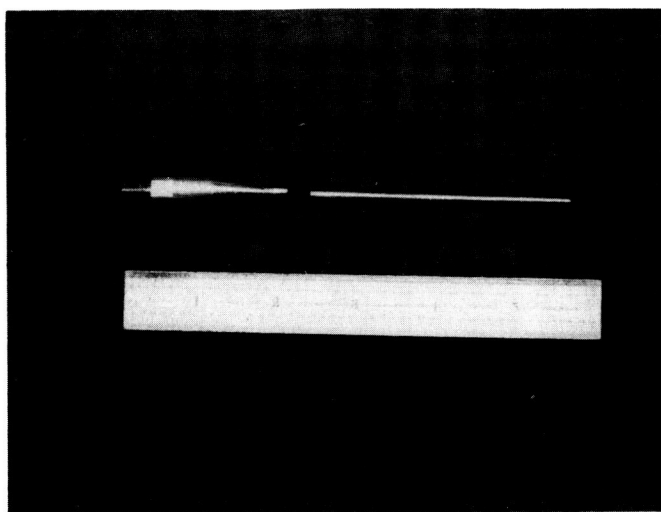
TYPICAL FATIGUE SPECIMEN SHOWING FAILURE
